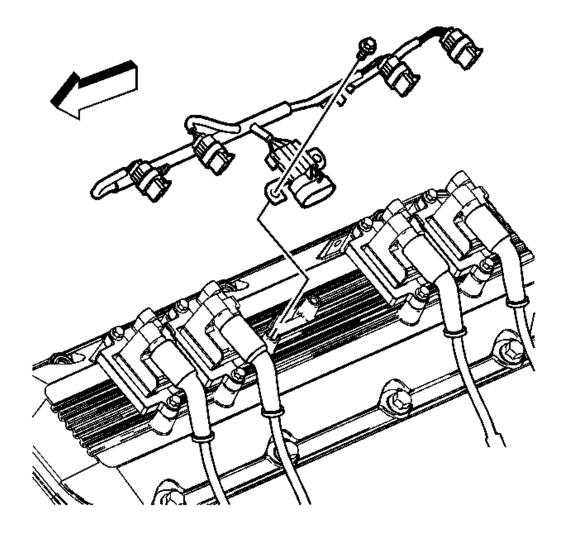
View Of Ignition Coil Wiring Harness Courtesy of GENERAL MOTORS CORP.
